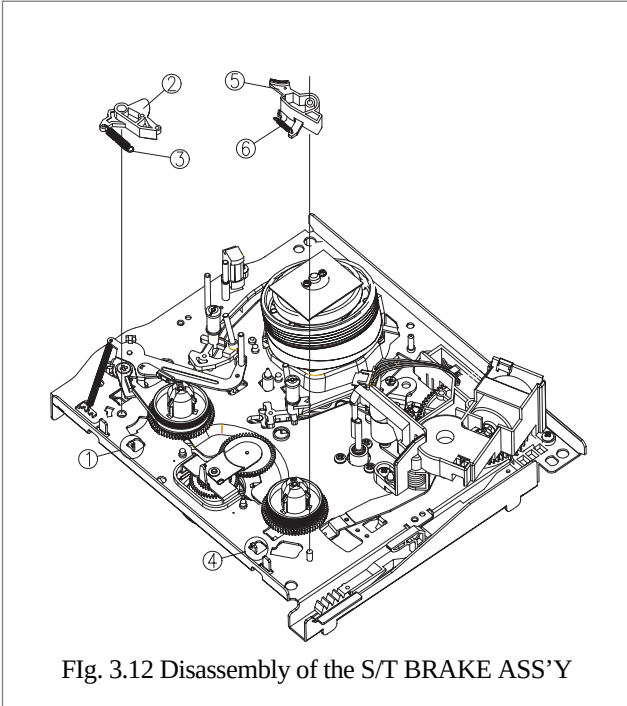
Disassembly of the S/T BRAKE ASS'Y
